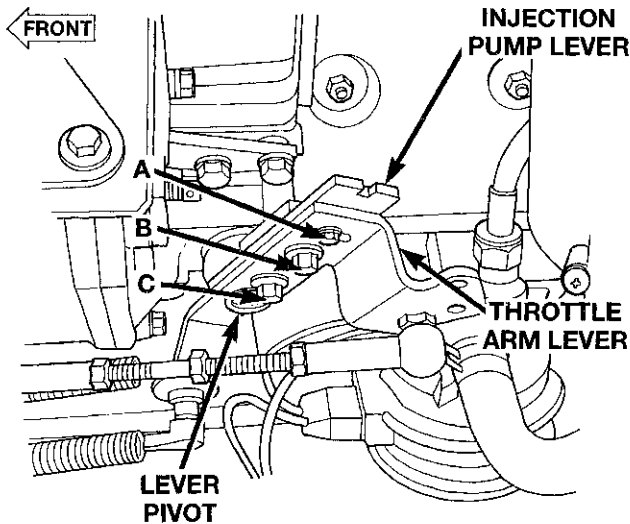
Fuel Injection Pump Lever / Throttle Arm Lever
